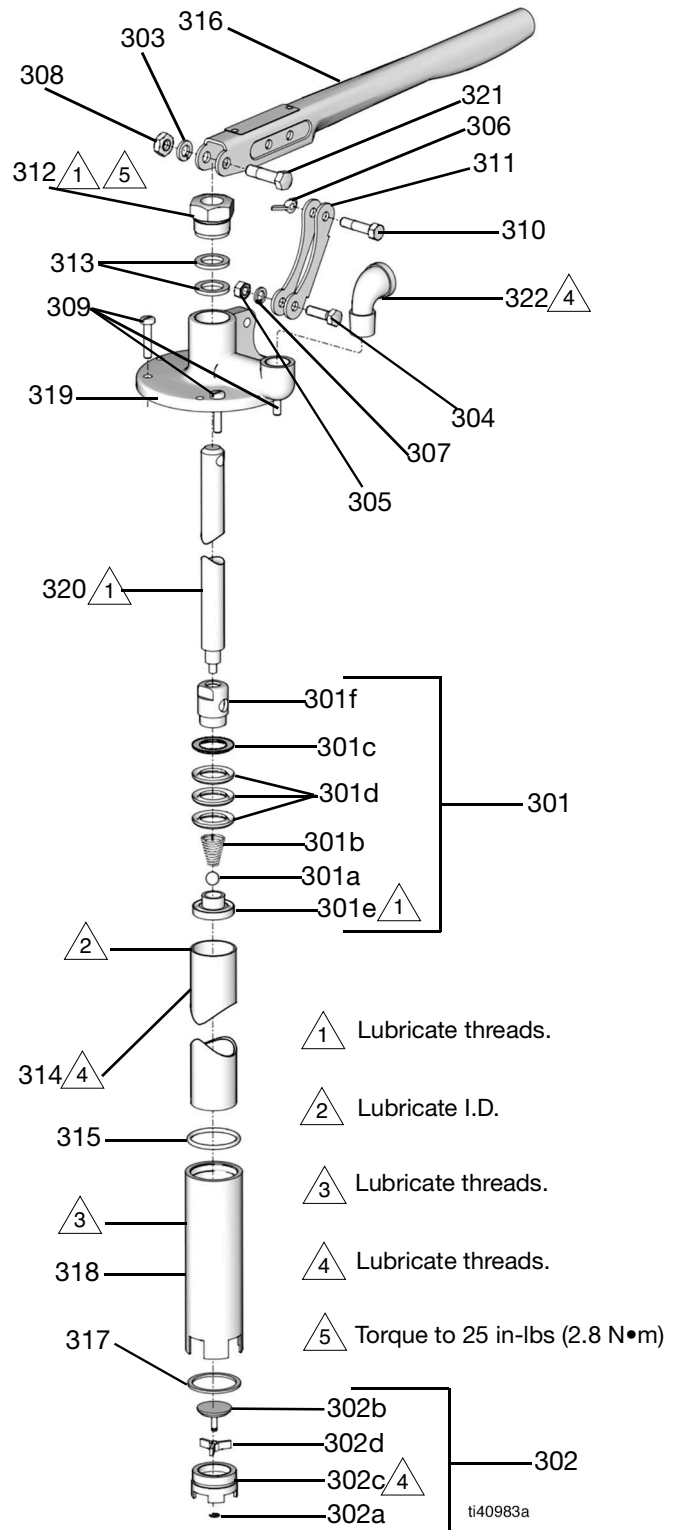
Hand Pump Assembly, Model 204867, Series A
